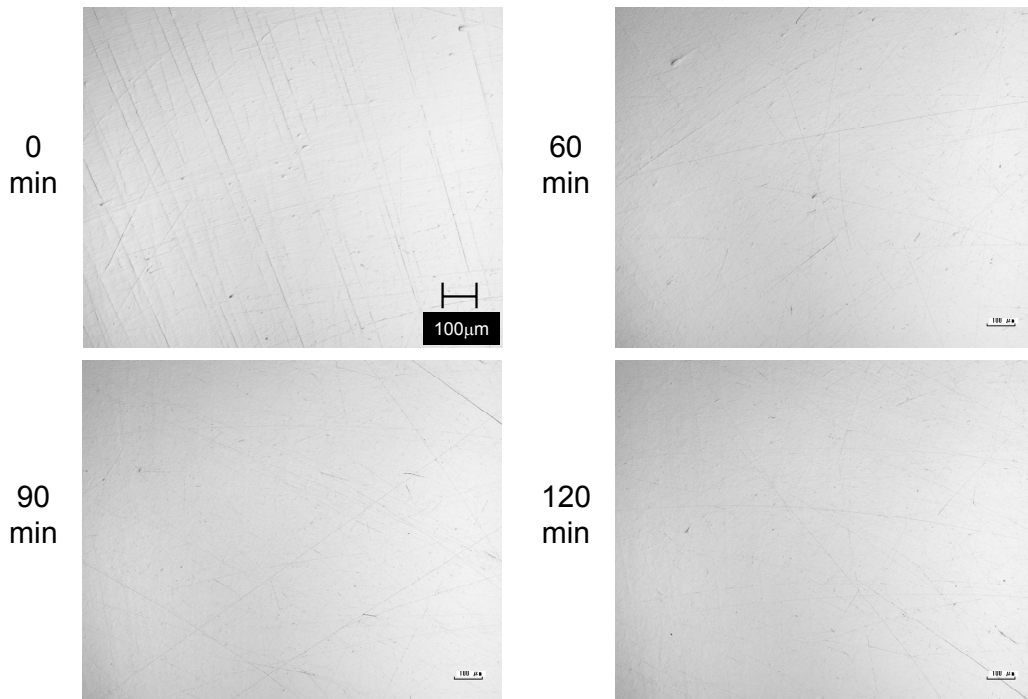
Surface of workpiece at the peripheral part ( # 1200 )
